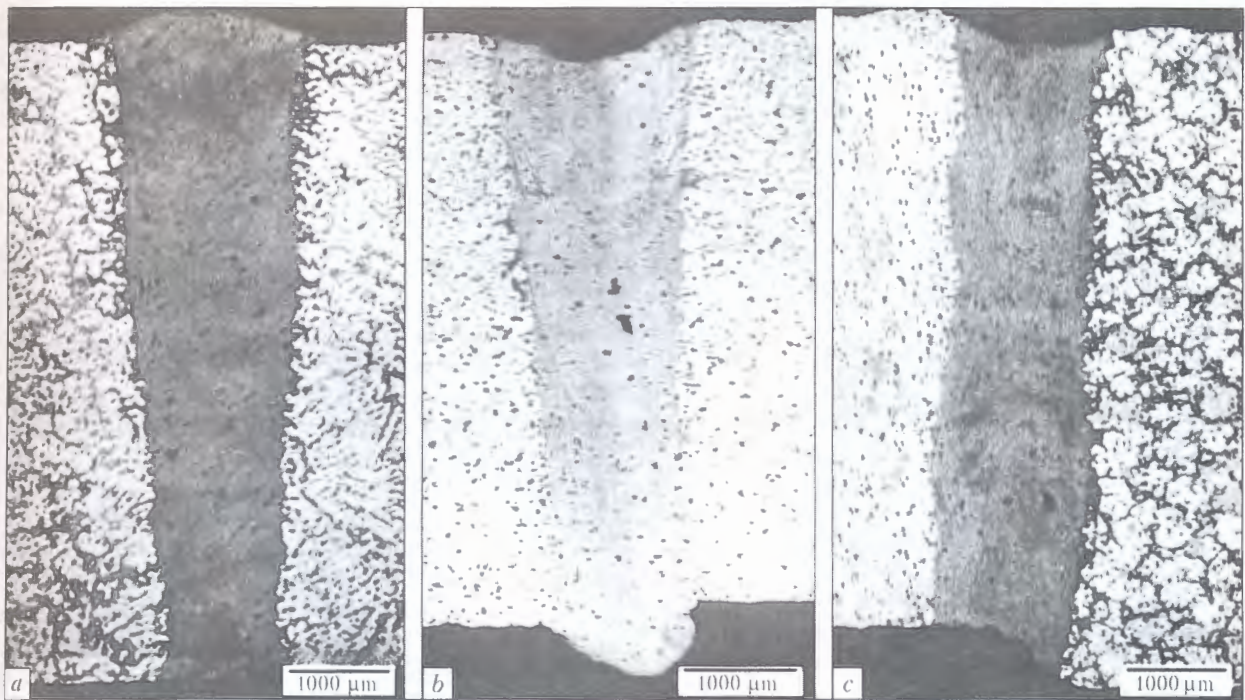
Macrostructure of butt-welded joints: *a* – AZ91-AZ91; *b* – AM50-AM50; *c* – AM50-AZ91
